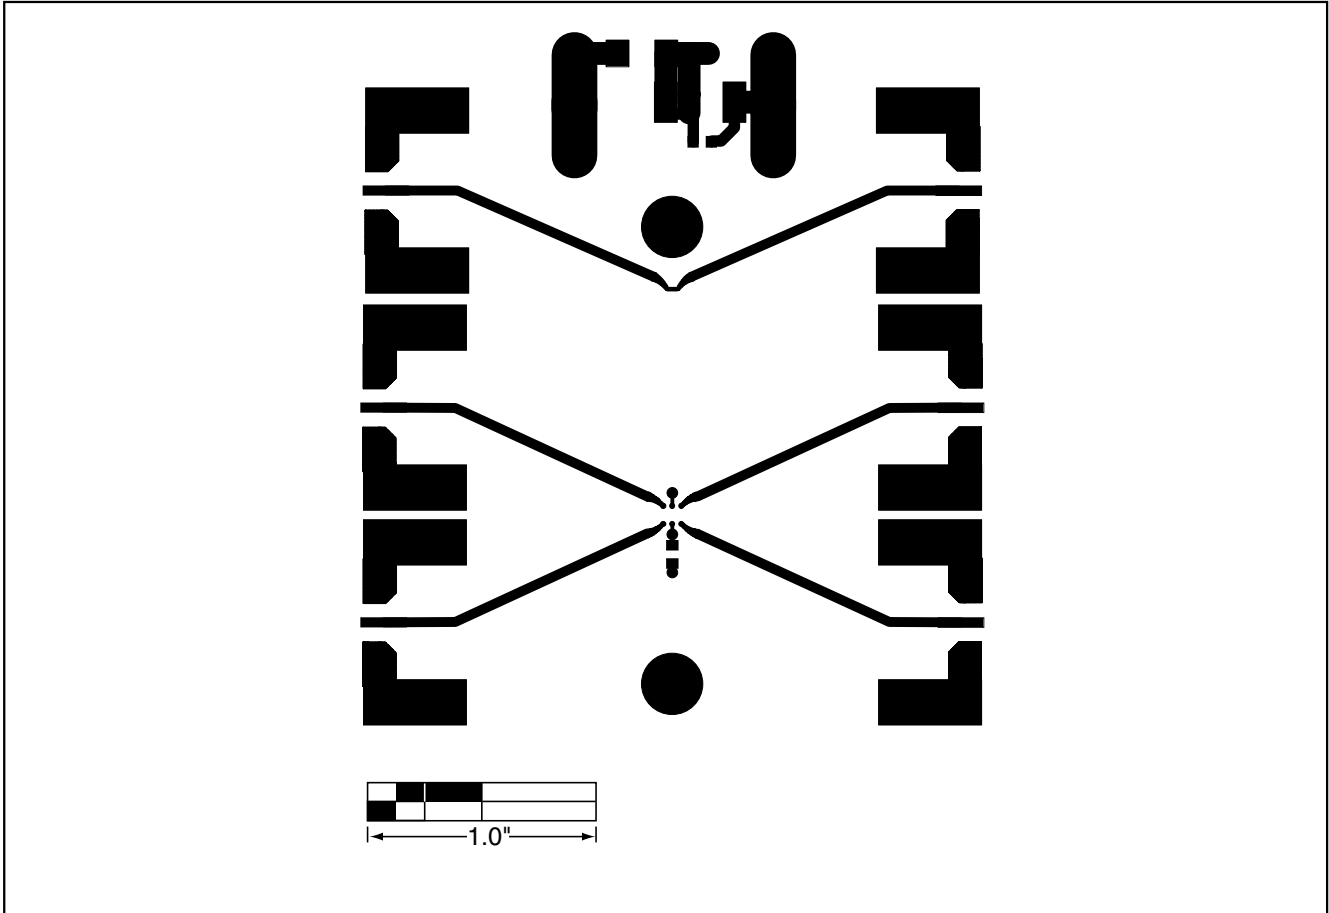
MAX3785 EV Kit PC Board Layout—Component Side
